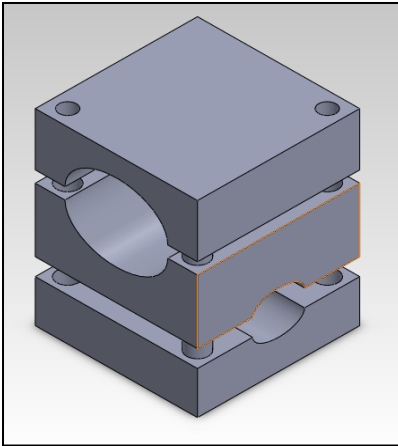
Three Piece "LEGO®" and Screw Clamp (Rod to Pin)
